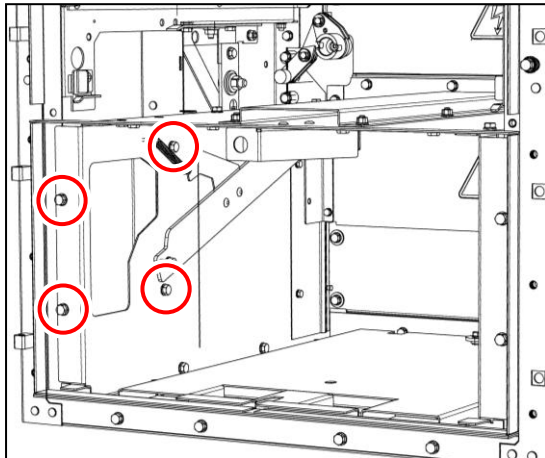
4 bolted joints on metal cover in voltage transformer compartment
